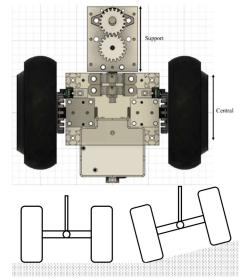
Top view of main chassis, 4b) Passive suspension with free bearing
